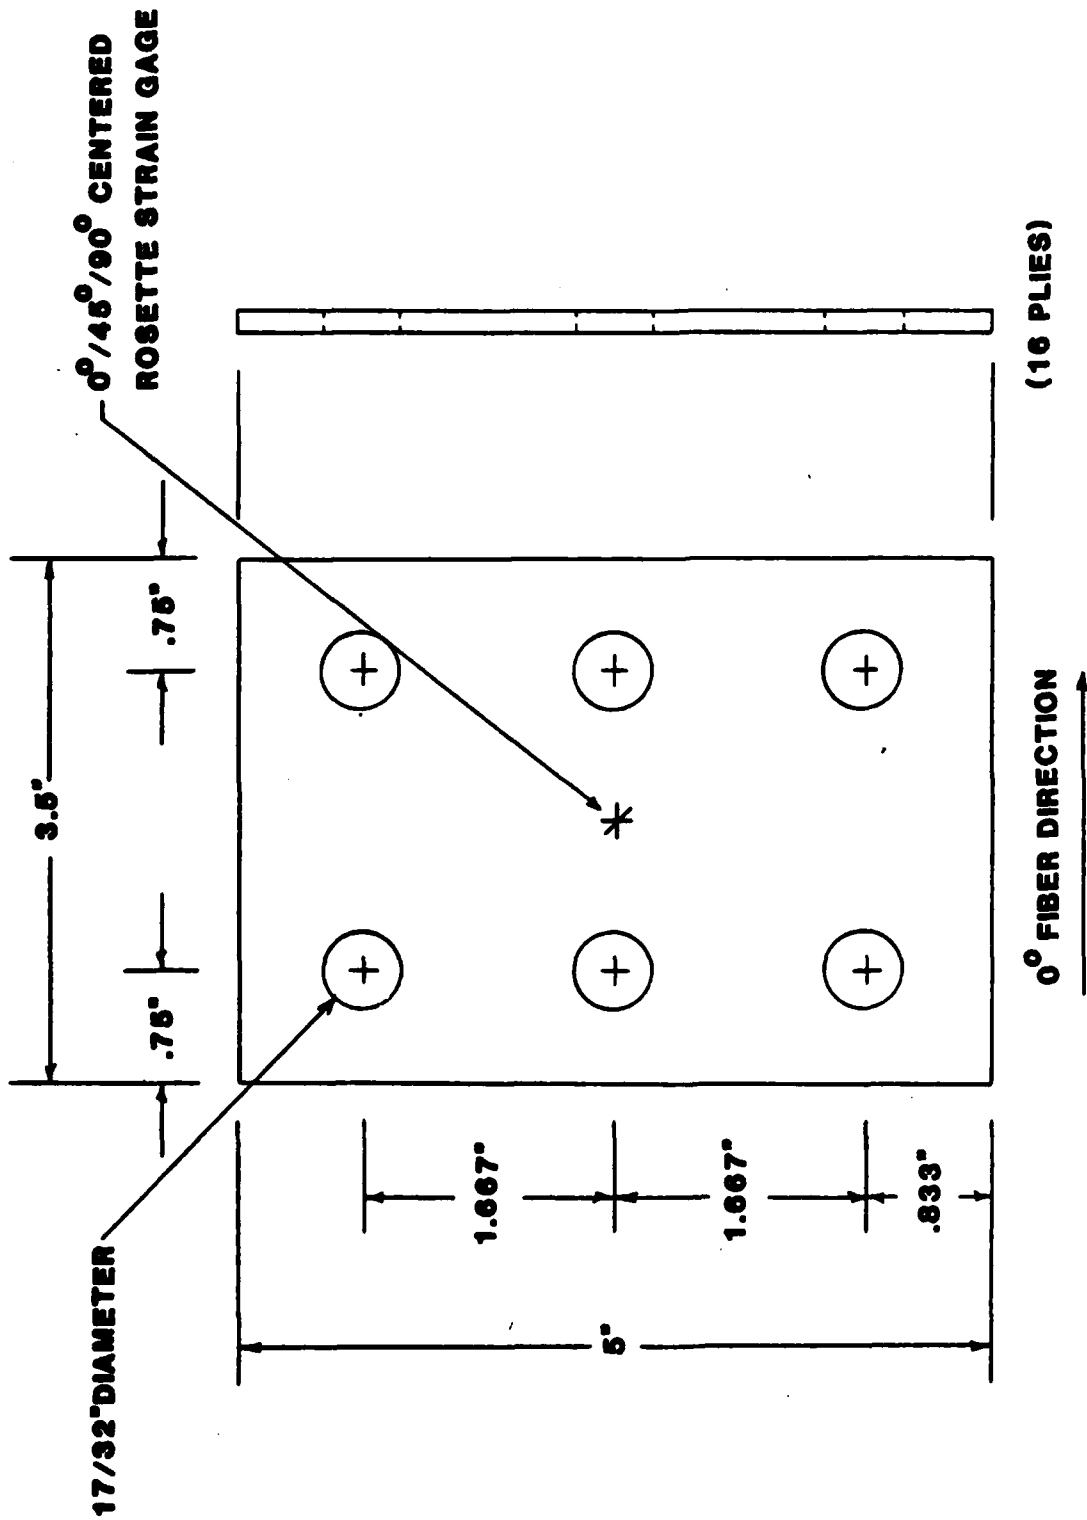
RAIL SHEAR TEST SPECIMEN (LOAD INTRODUCTION RAILS NOT SHOWN).
